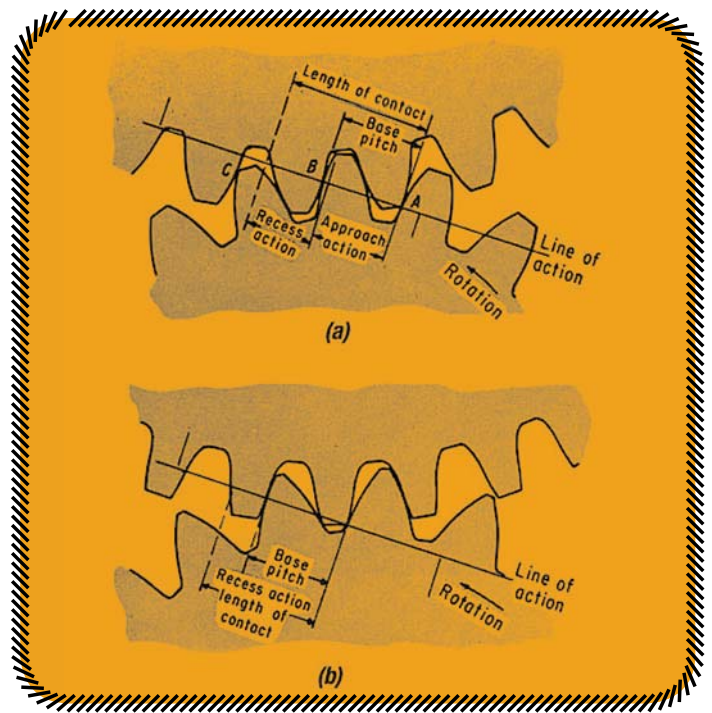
COMPARISON OF INVOLUTE GEARS (A) AND FULL-RECESS GEARS (B). IN FULL-RECESS GEAR SETS, THE TEETH OF ONE OF THE GEARS HAVE ALL-ADDENDUM PROFILES, WHILE THOSE OF THE MATING GEAR ARE ALL DEDENDUM.
